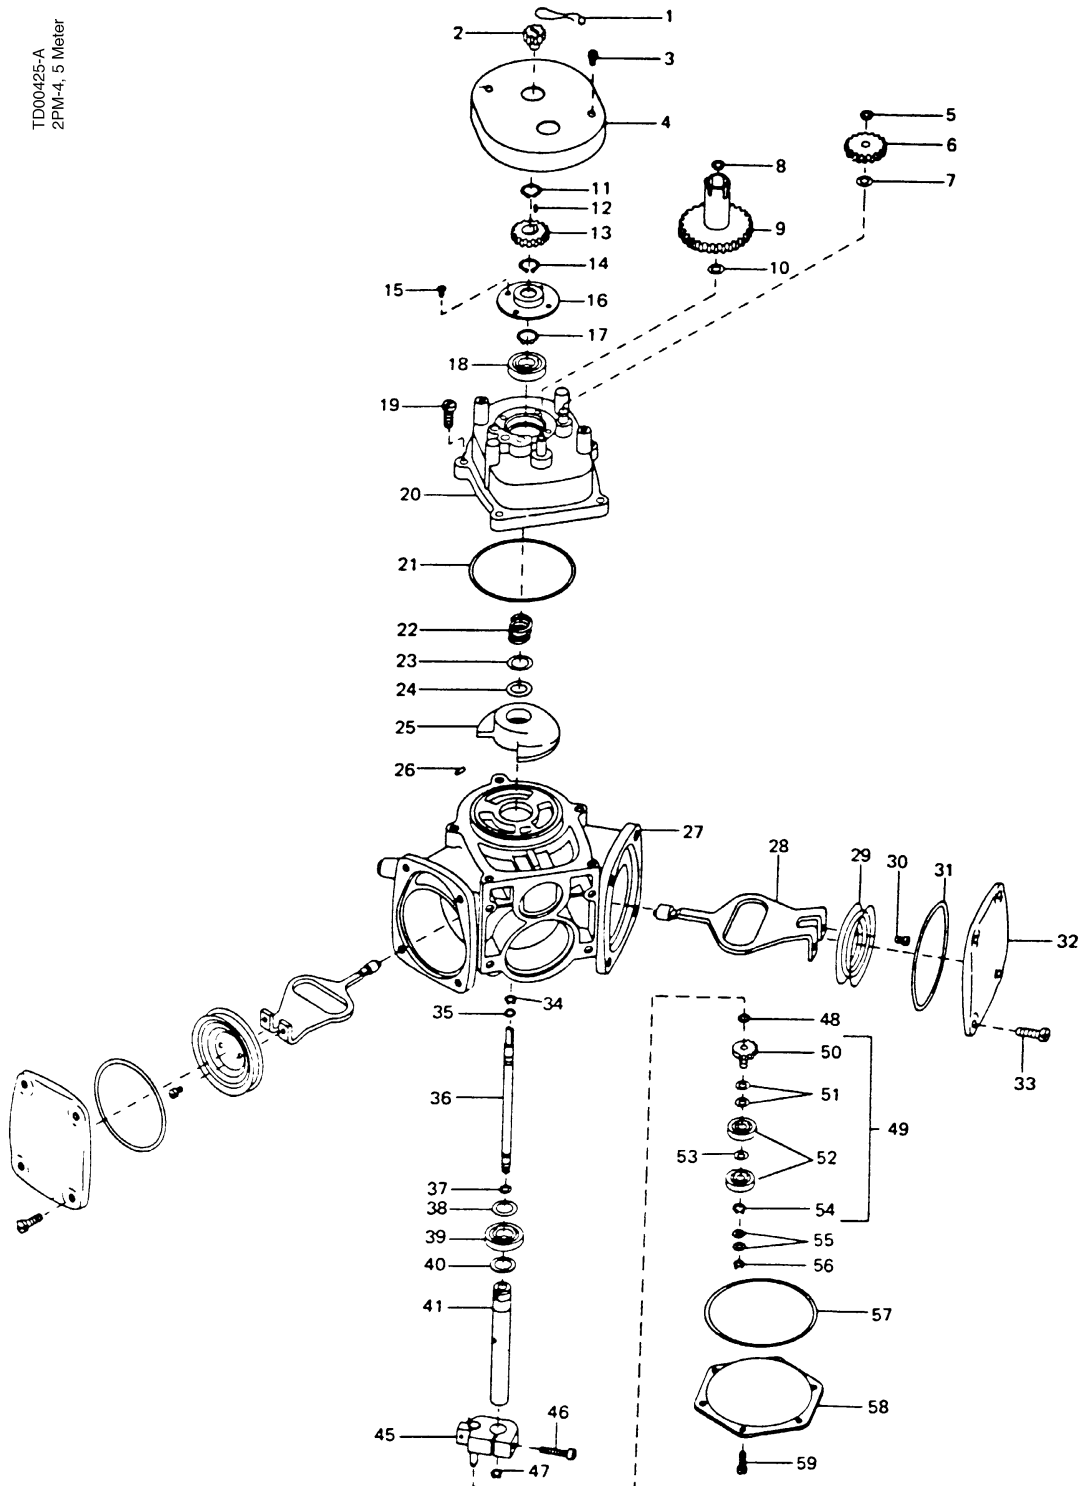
2PM-4 SERIES METER ASSEMBLY
